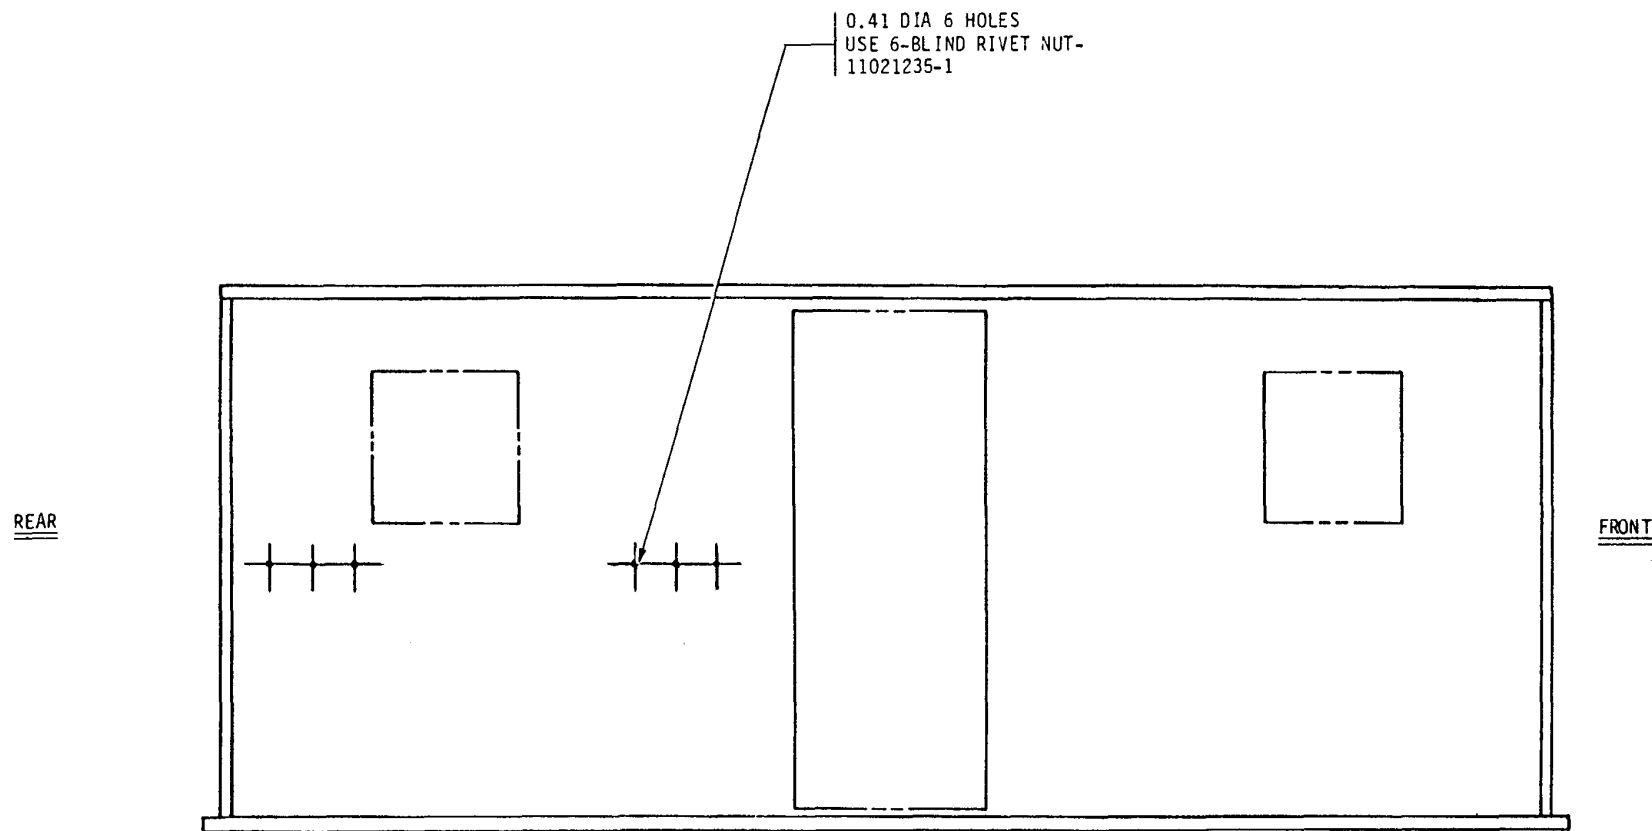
Dimensions for blind rivet nut installation in deployed left wall, unit 2, ISO-2-1.
